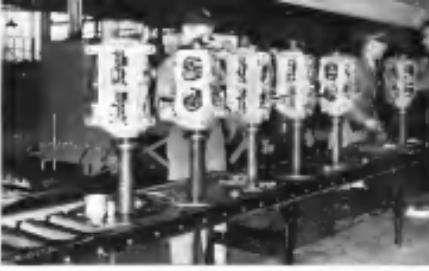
The flywheel is bolted after the connecting rods have been assembled.
